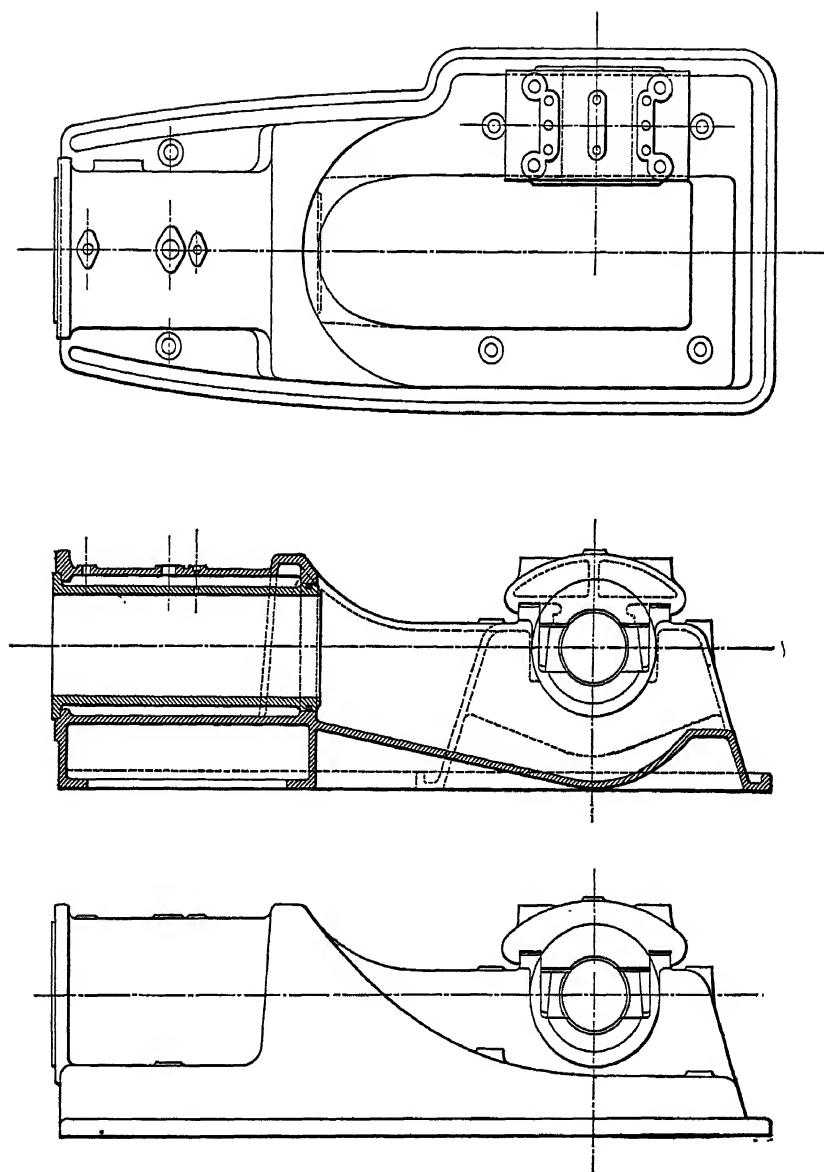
Engine-Bed for Side-Crank Shaft.
